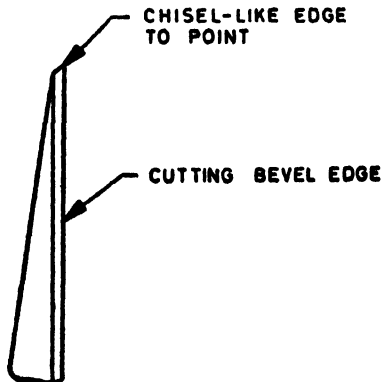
SHARP POINT OF SURGICAL DRESSING AND STITCH SCISSORS (ENLARGED)
